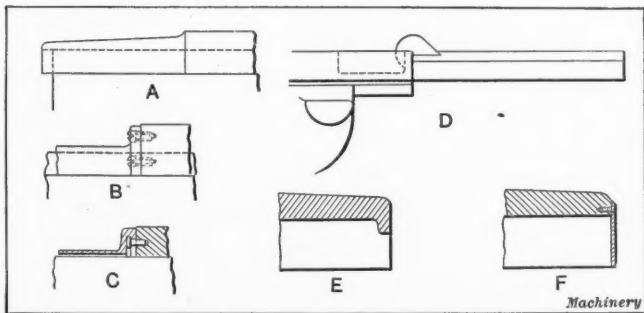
Devices for protecting Slides of Lathes and Grinders
